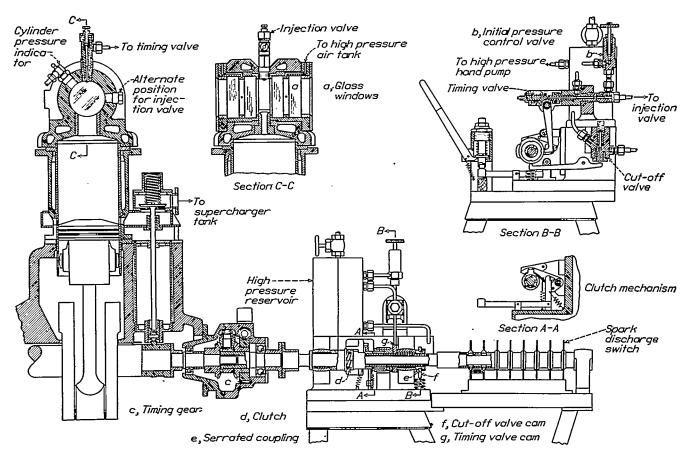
Single-cylinder test engine and fuel-injection system
